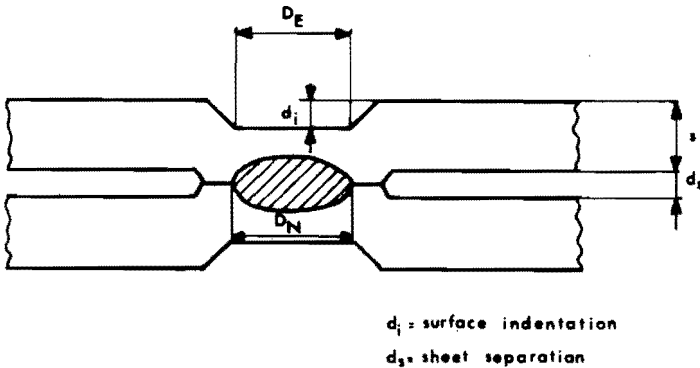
Appearance of a Spot Welded Joint
